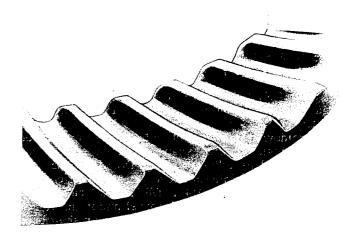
Satisfactory Tooth Contact - Gears Loaded (T-31449)
